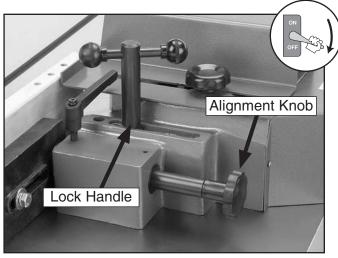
Fence board lock handle and alignment knob (right side only shown).
